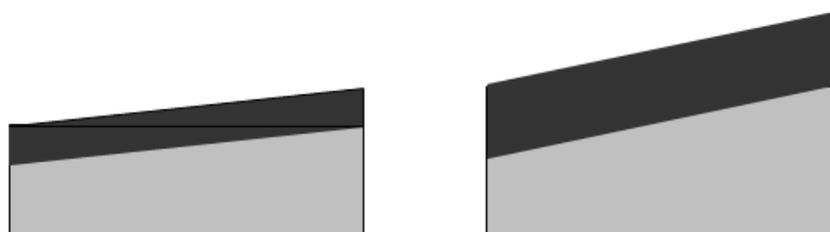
the minor omitting of the carburized layer in conically machining A) after machining, B) before machining
